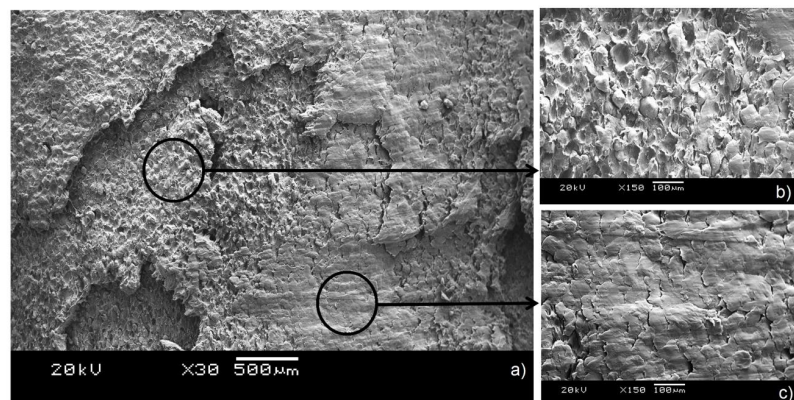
Compressive failure surfaces showing a) regions of failure, b) partially sintered material, c) worn path due to failure.
